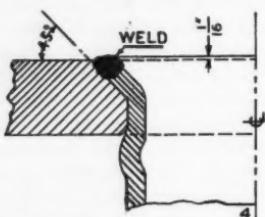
Cross-section of joint of sheet and flue showing method of countersinking sheet and expanding flue to fill bevel. The joint is shown after the weld has been made.
